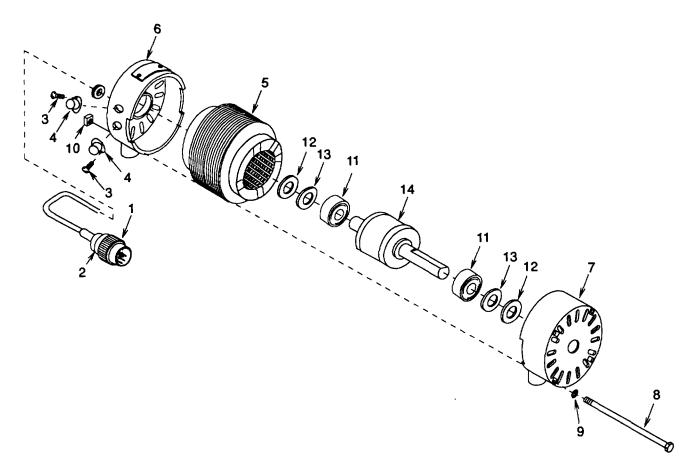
Motor Assembly, Motor Appliance Corp Model WO792 (3 phase)
